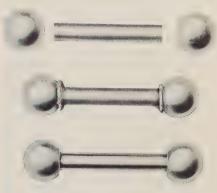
Due to the necessity for extremely round, hard balls on each end of the connecting rod, it was necessary to develop a new method of manufacture. The manufacturing tolerance on spherocity of 0.0001 total indicator reading is maintained by welding ball bearing balls to a soft steel rod and grinding off the flash formed at the weld. This resulted in a much less expensive part with improved functional qualities.
